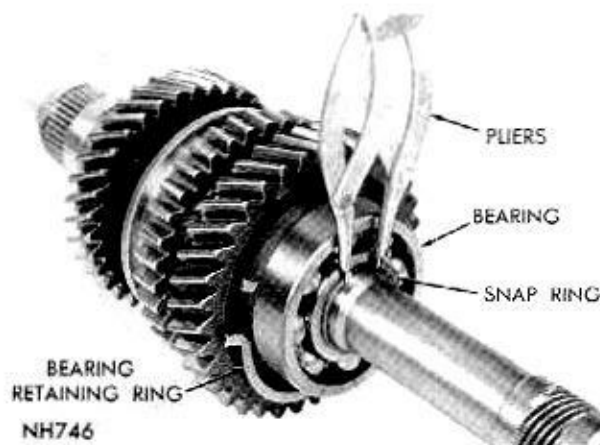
Removing or Installing Mainshaft Bearing Snap Ring—Rear
